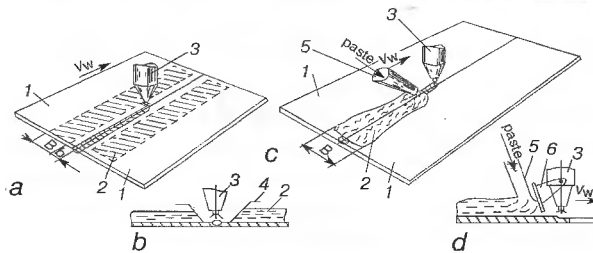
Process diagrams of application of heat-absorbing paste in welding [25]: a, b — prior application of the paste; c, d — paste feeding behind the torch concurrent with welding: 1 — plates being welded; 2 — applied paste; 3 — torch; 4 — protective stationary screen; 5 — outlet nozzle of the paste feeding device; 6 — mobile protective screen.
